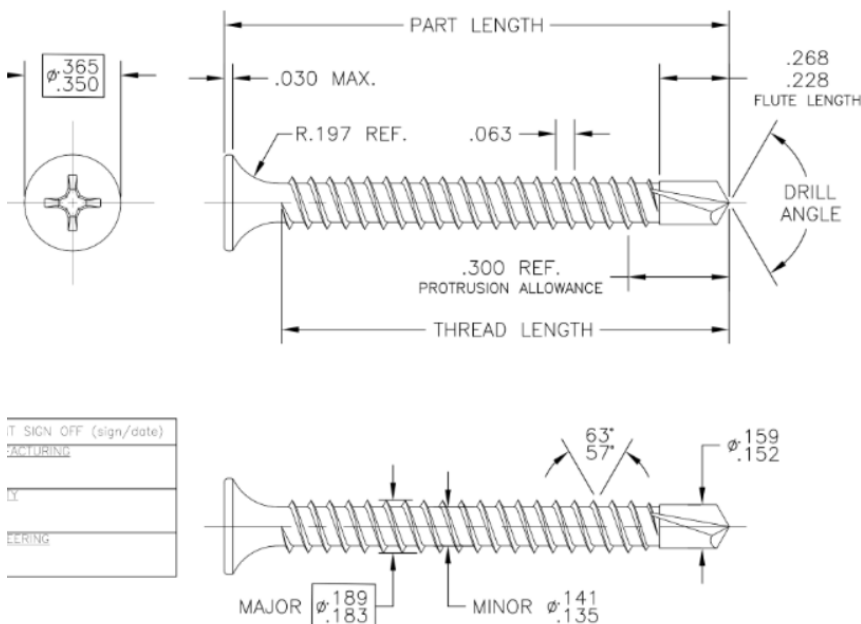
Bugle headed #10 drilling screw to be used with TubeSeal™ in steel stud connections.
